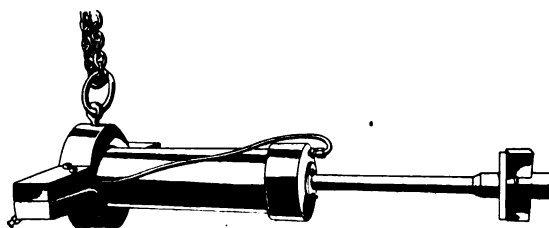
HYDRAULIC BUSHING EXTRACTOR
